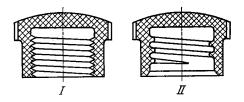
Thread in moulded cap I—incorrect; II—correct
